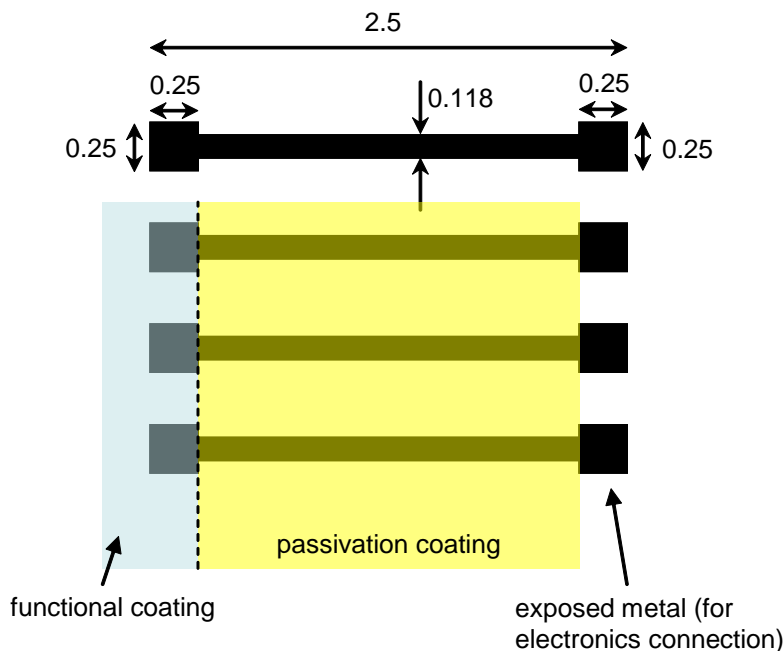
The as-printed repeating electrode geometry is shown in black, with dimensions shown in inches on the top electrode. The passivation coating provides electrical insulation and protects the printed metal from exposure to water. The functional coating enhances selectivity (in the case of working electrodes) or stability (in the case of reference electrodes). Coatings are deposited on top of the printed and dried electrodes via a continuous, roll-to-roll slot-die coating method in which the machine direction is vertical in this diagram.
